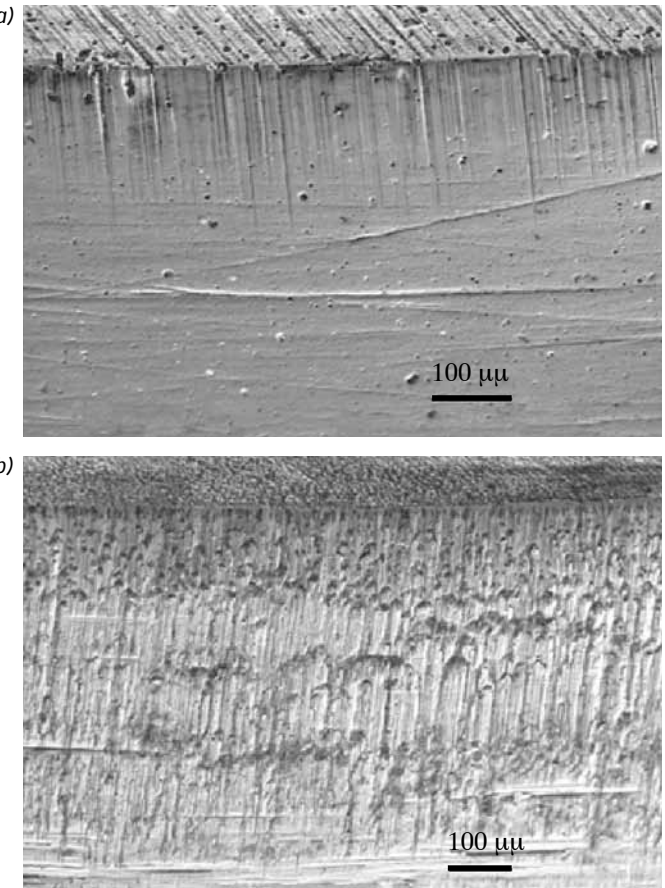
A blanking edge coated with a) PVD-coating (TiAlN) and b) uncoated after 200 000 parts produced in Docol 800 DP.
